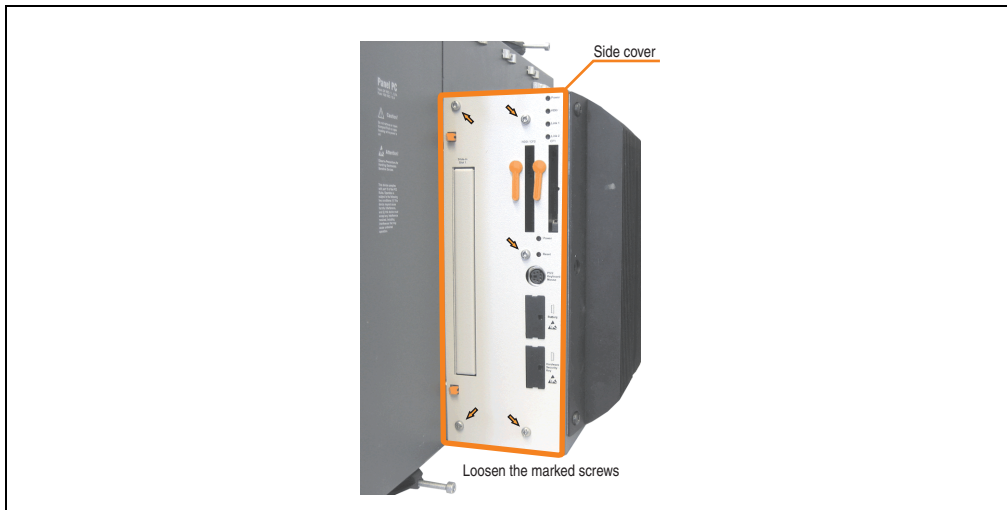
Example - Side cover removal on the system unit 5PC720.1505-02
